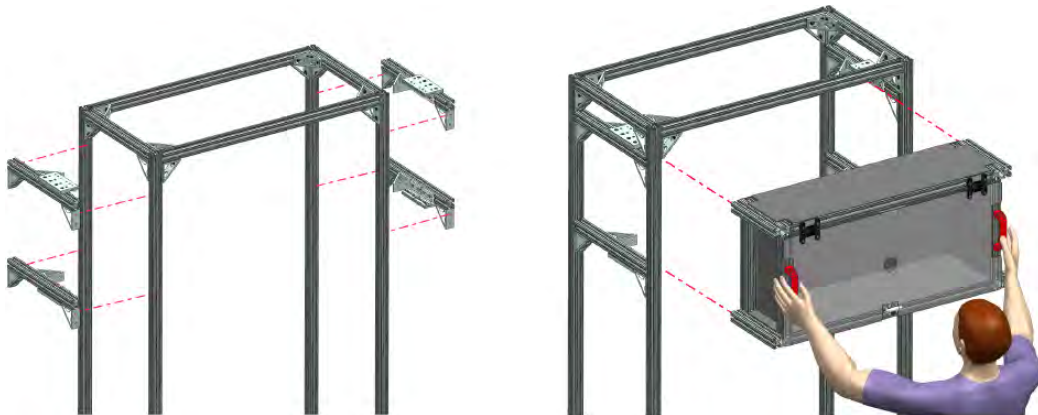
Slide Bearing Rail Install (left) & OSM Slide Rail Insertion (right)
